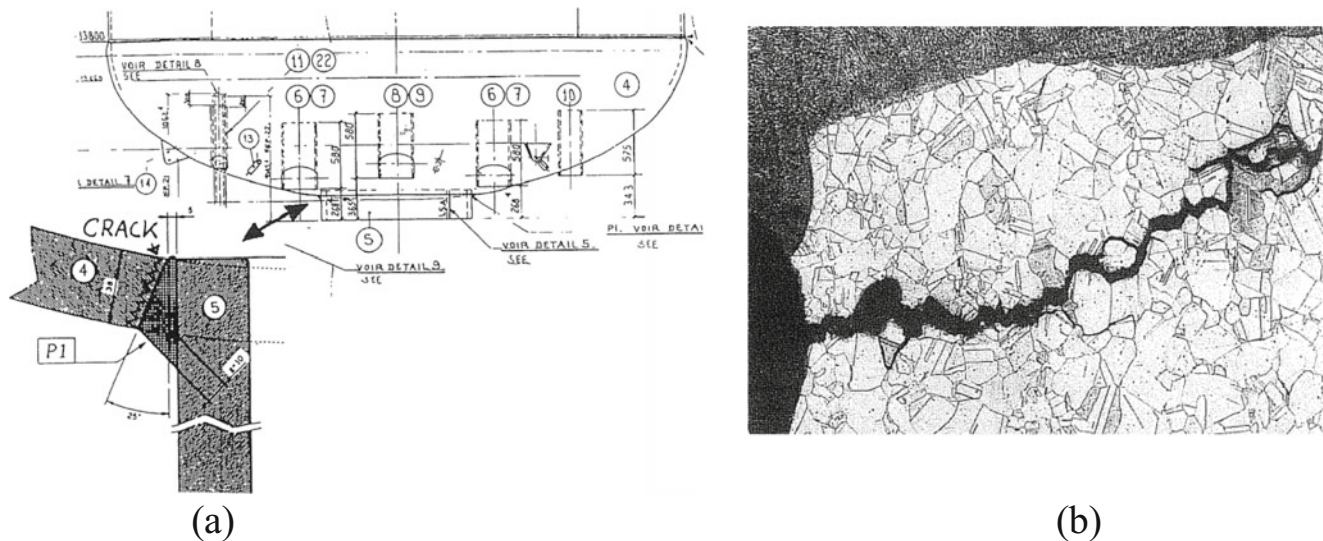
Location of cracking in nozzle welds and in 42-mm thick reduction piece in 321 SS with 347 SS during PWHT at 850–900 °C. (Source: *Welding in the World* 41 (1998), p206). (a) Location of cracking in nozzle welds with 347 SS. (b) Cracking in 42 mm thick Reduction Piece in 321 SS
